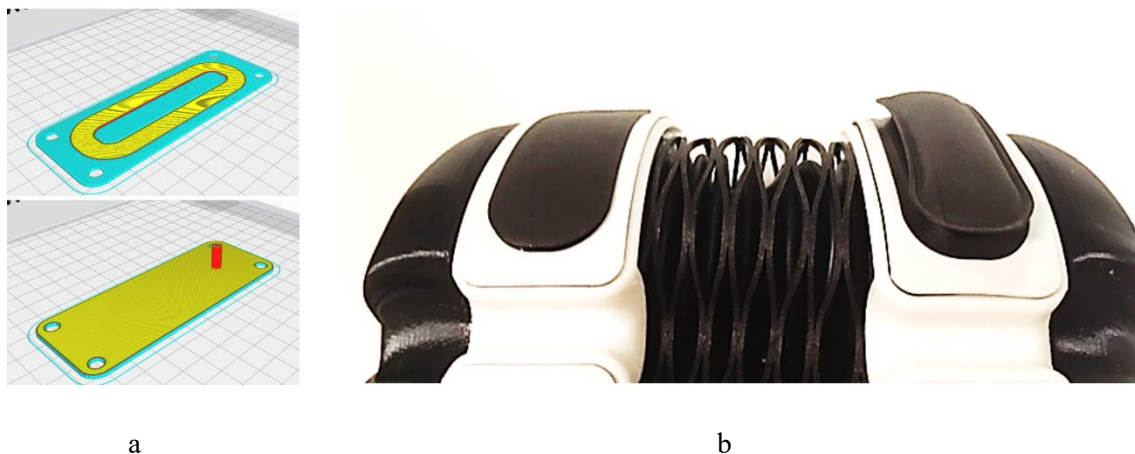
3D printed pillows: (a.) Layers for 3D printing in Ultimaker Cura, (b.) 3D printed TPU pillows in use.
